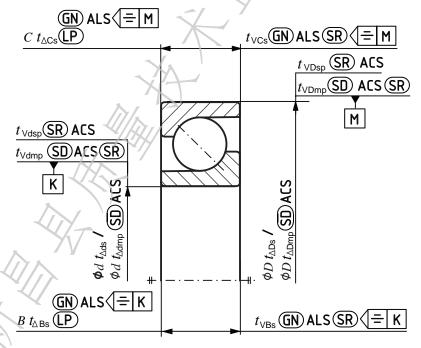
Size specification for single components for bearing with cylindrical bore and symmetrical rings
